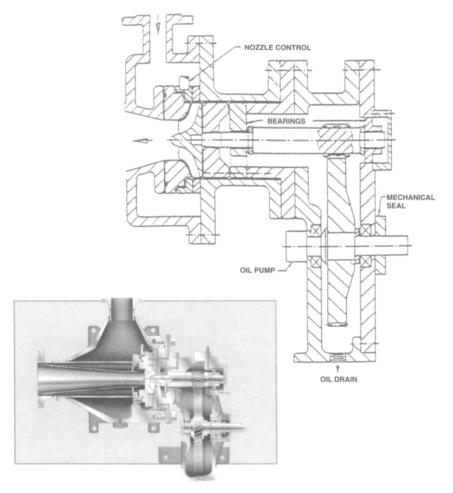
Cross-section of an expander with integral gear for power recovery.
